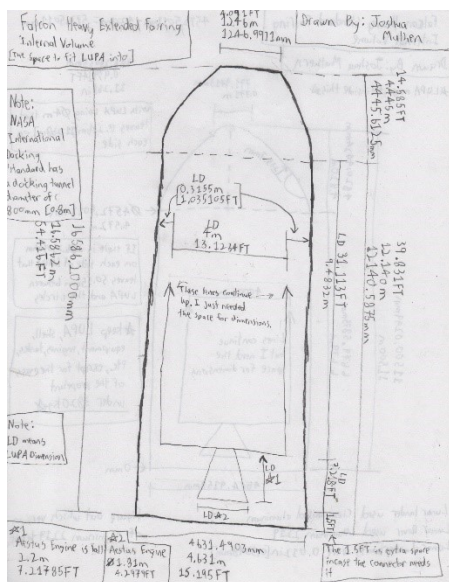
Hand Drawing Falcon Heavy Extended Fairings Internal Volume
